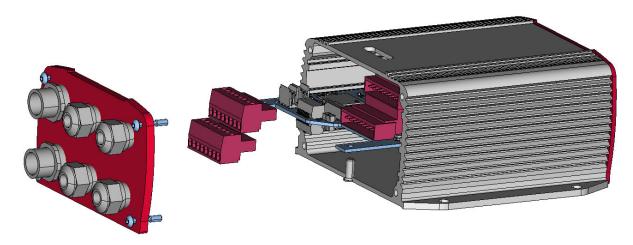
Pc board with removable terminal blocks EMGZ492_W_PNET_16-11.30.FCStd
